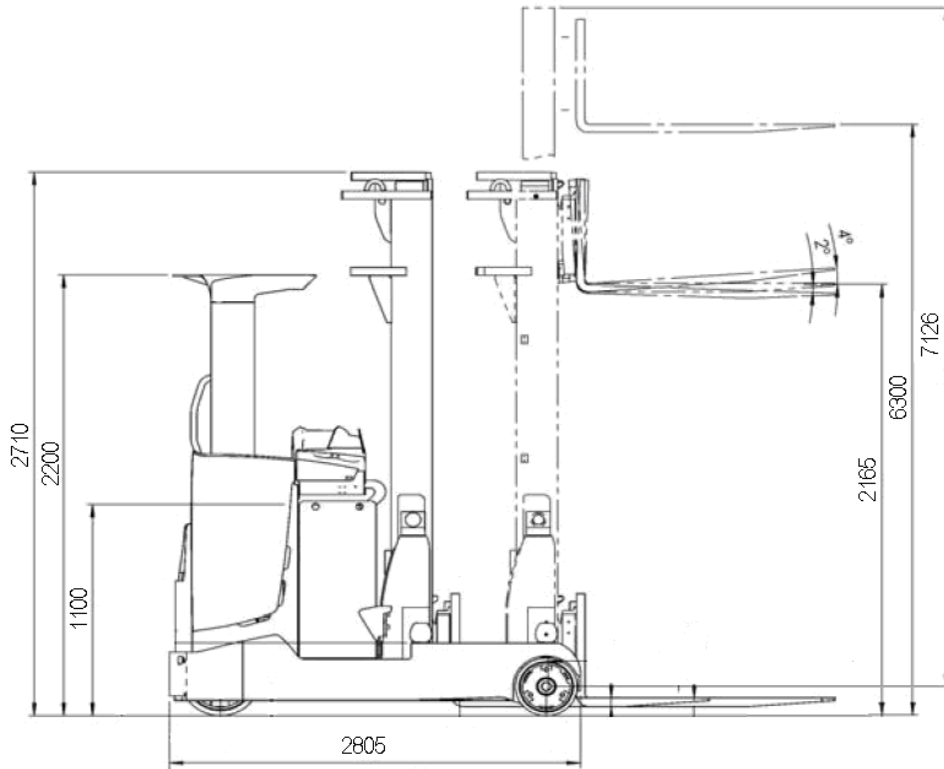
Physical dimensions of Rocla HS16F forklift.
